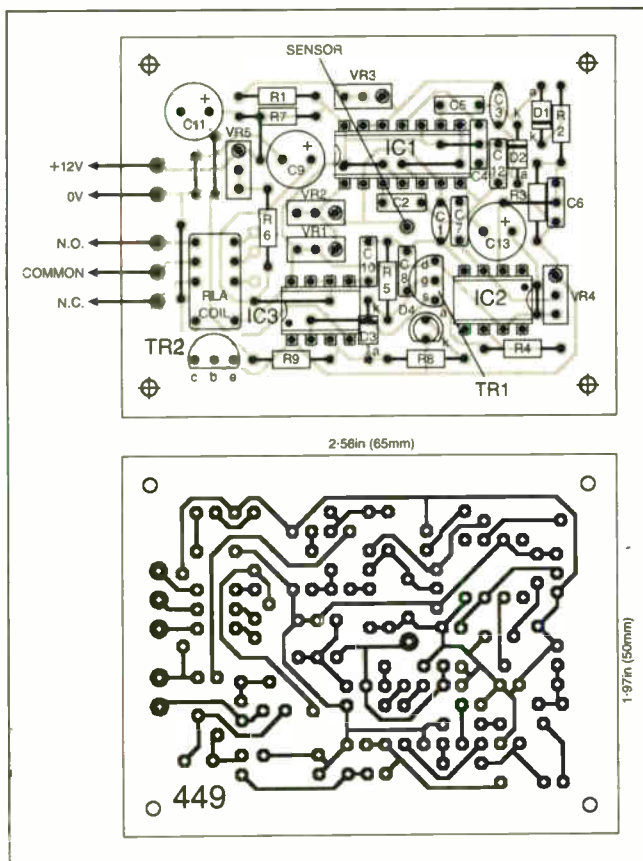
Printed circuit board topside component layout, wiring and full-size underside copper master for the Body Detector MkII. Note, some of the link wires pass under some components.
